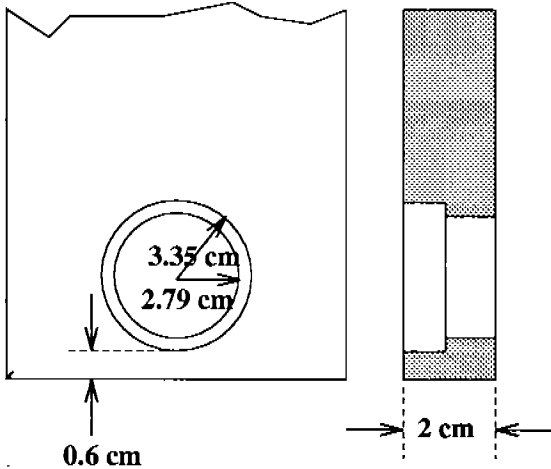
Top and side view sketches of a typical mounting hole in the endplate material.
